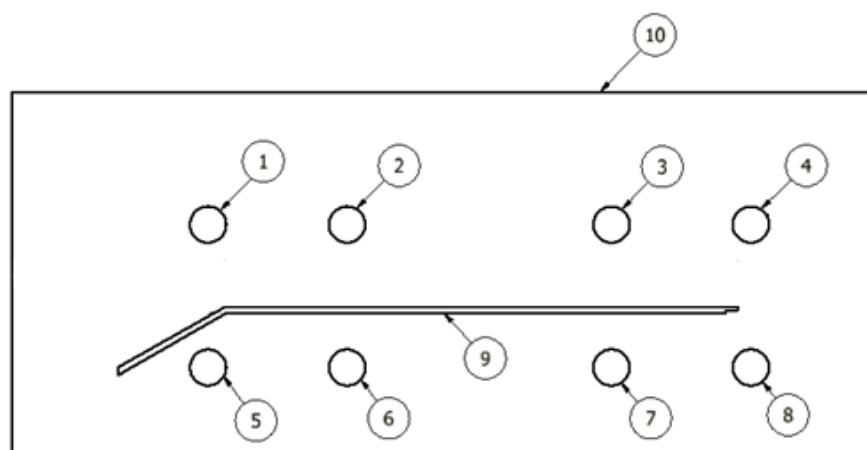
Assembly drawing of the mold, showing dimensions, in millimeter and components ID.
